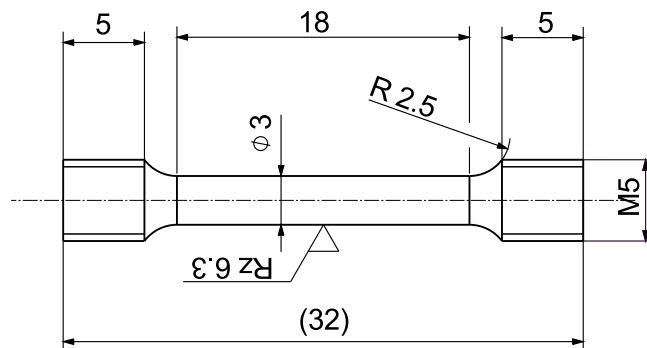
Drawing of tensile test specimen. It has a circular cross section with a diameter of 3 mm, a parallel length of 18 mm and M5 threads.
